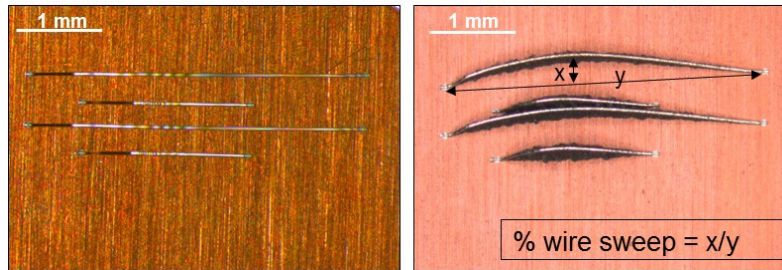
Wire bonds before the molding process (left), after the molding and laser ablation process, definition of wire sweep (right)
